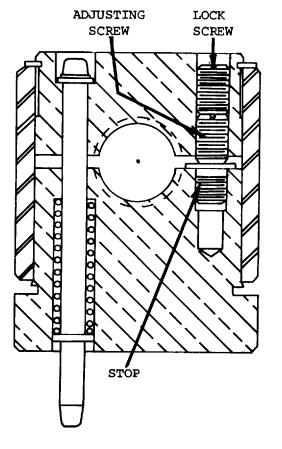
G. Adjustment of Bearings at Back End of Cross Feed Screw.
